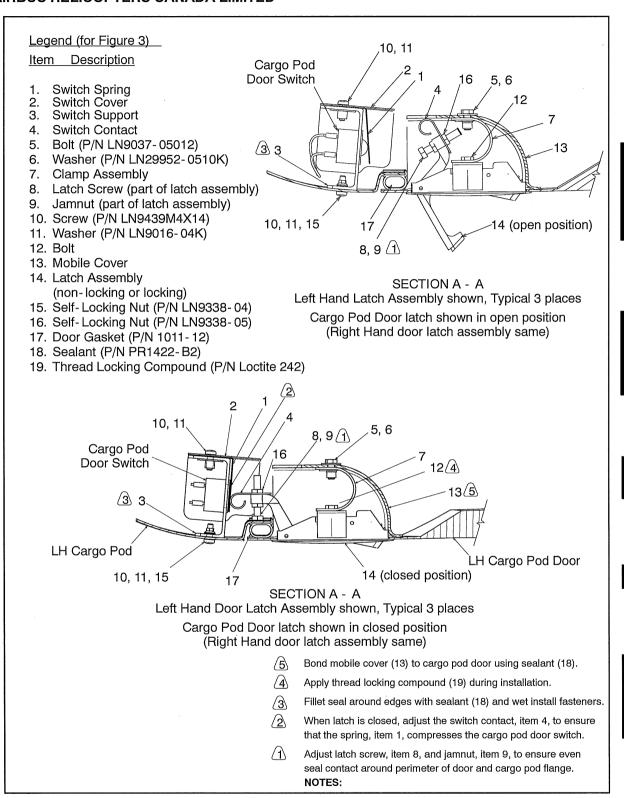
Cargo Pod Door Switch and Door Latch Assembly
